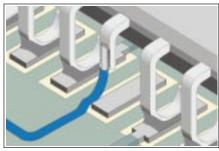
Acceptable* Wire soldered to clipped component lead. +
